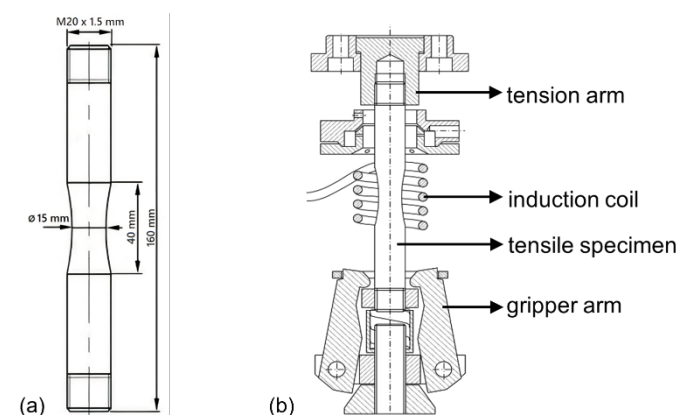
Sample geometry (a) and schematic assemble of the experiment (b) [30].
